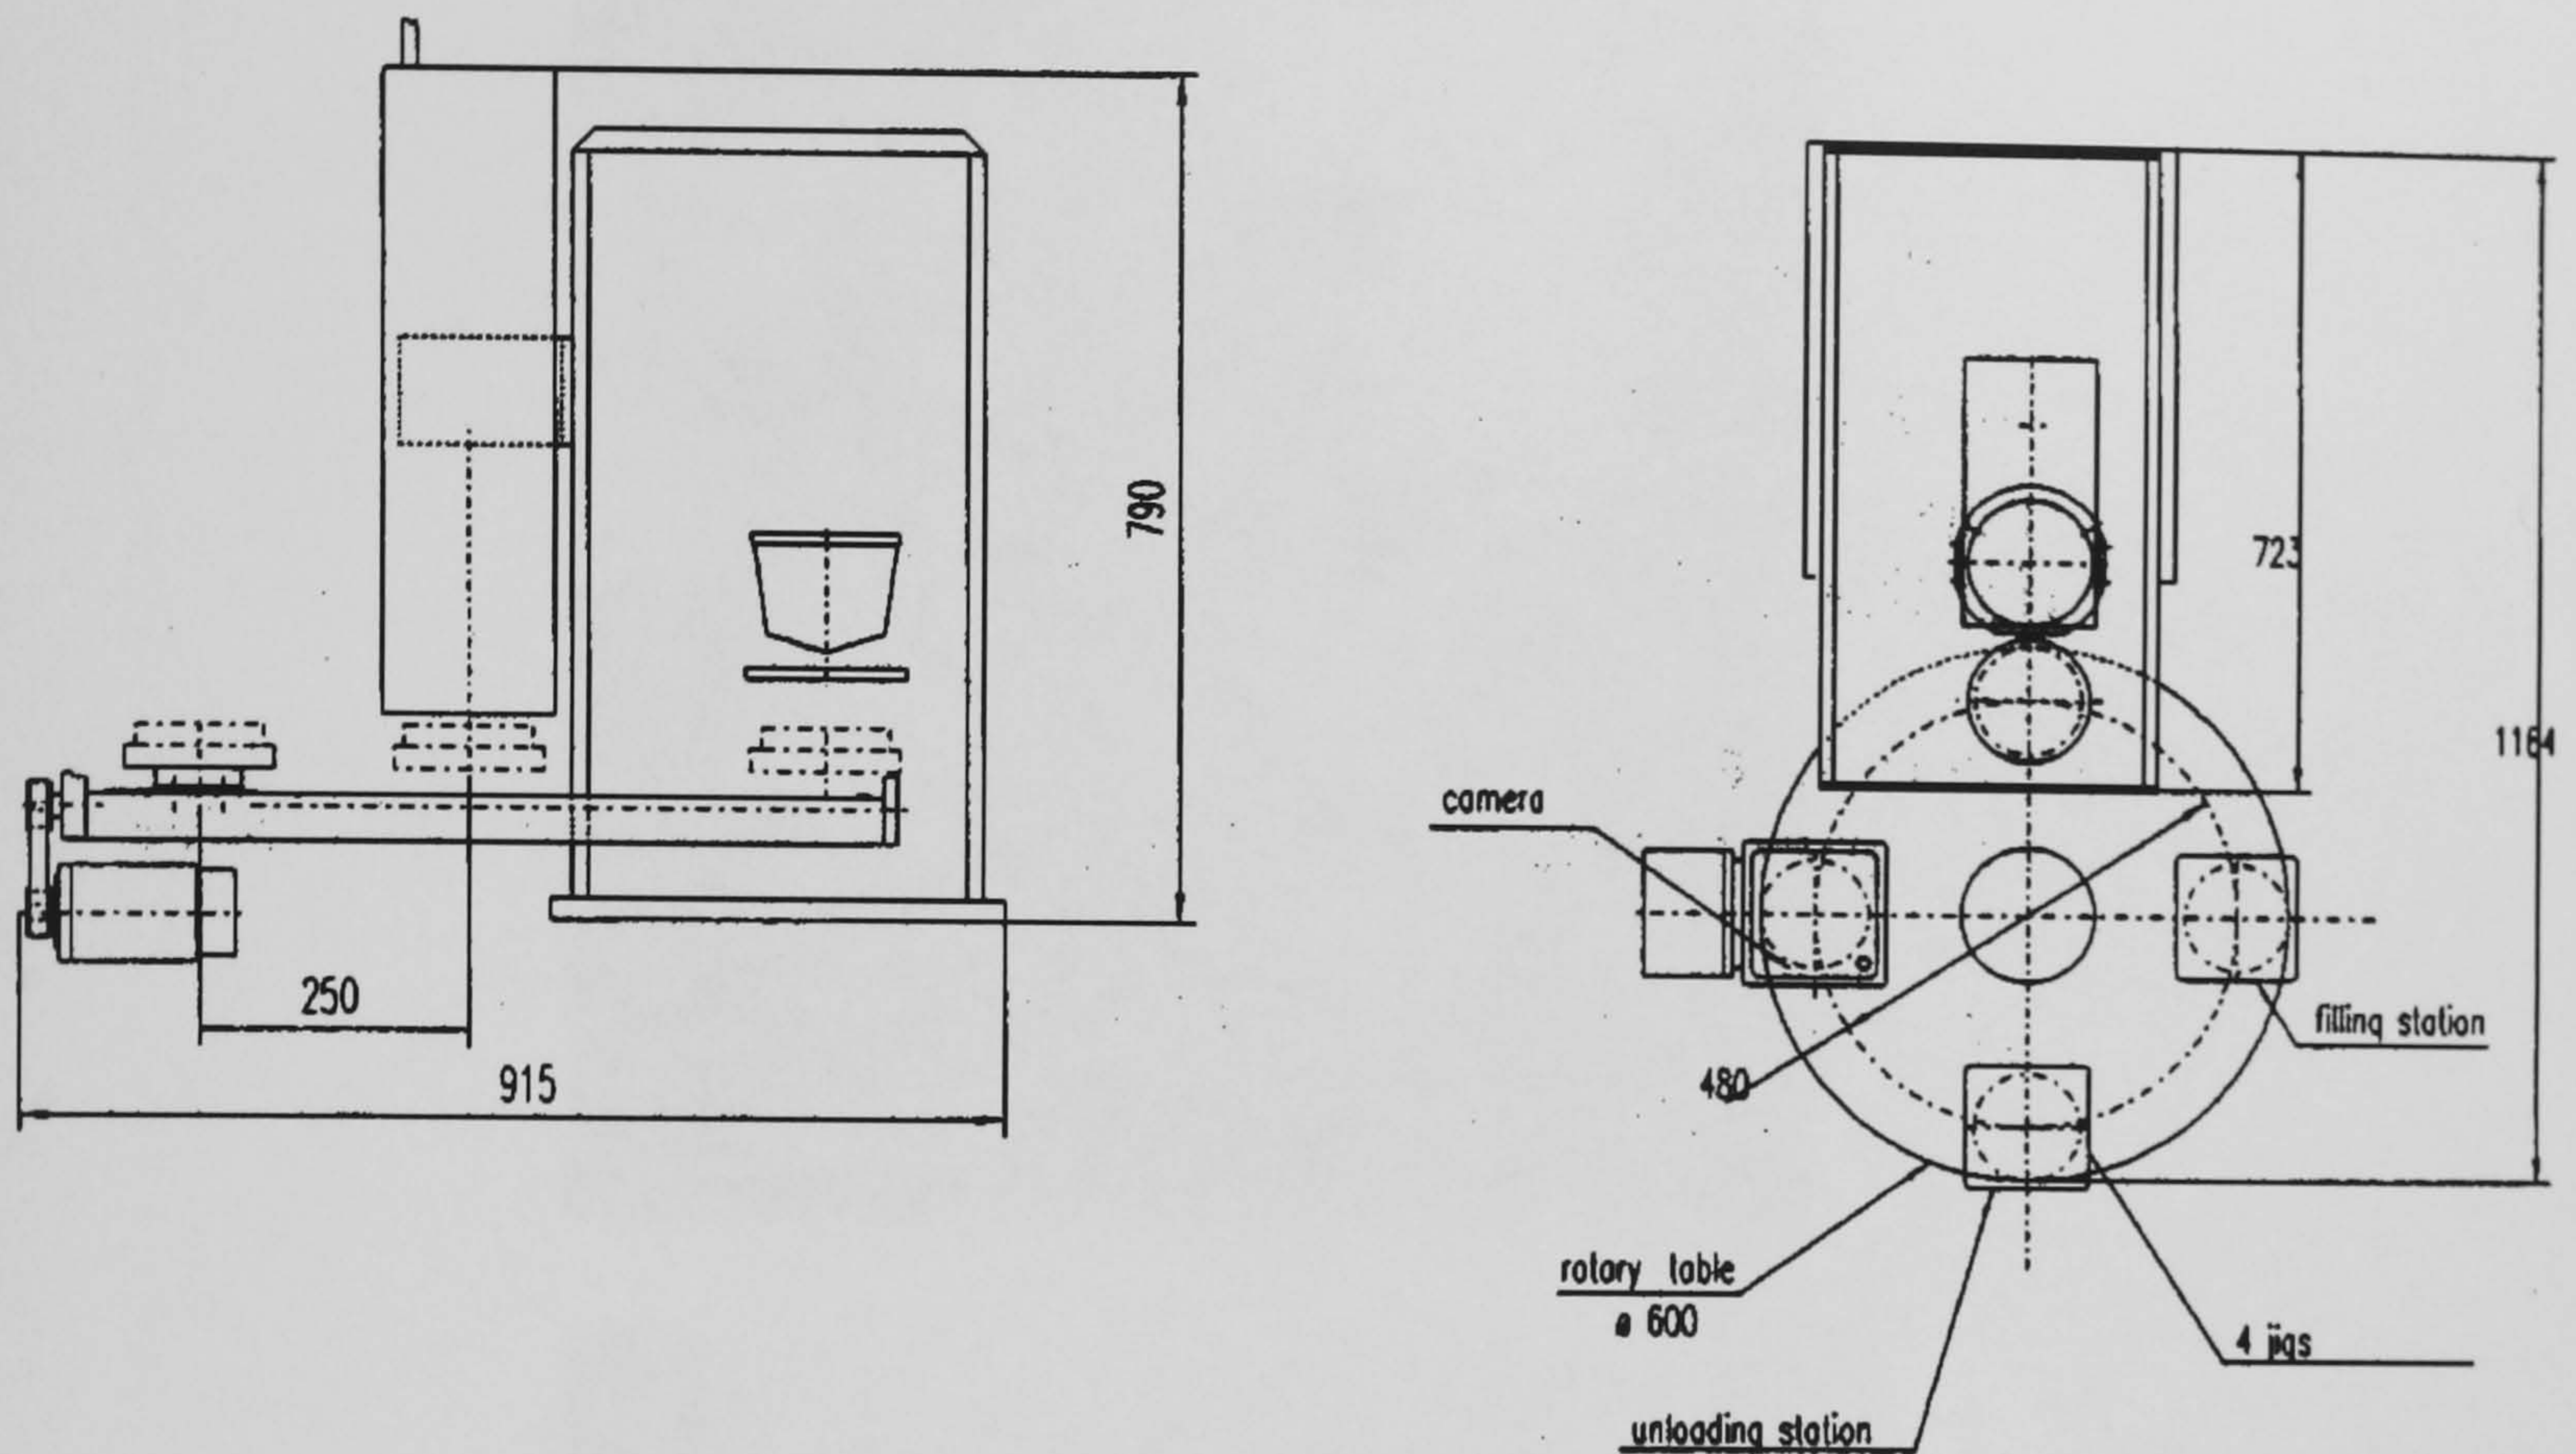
Plan and elevation drawings of the pre-prototype system
